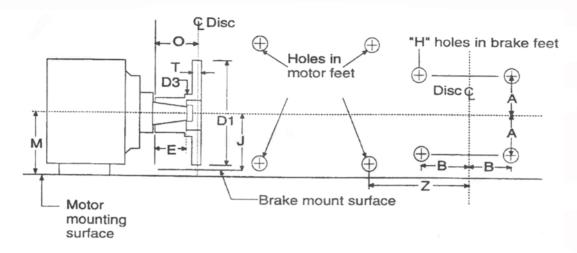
Disc brake configuration. Refer to Table 4 to determine actual dimensions for the applicable frame size.
